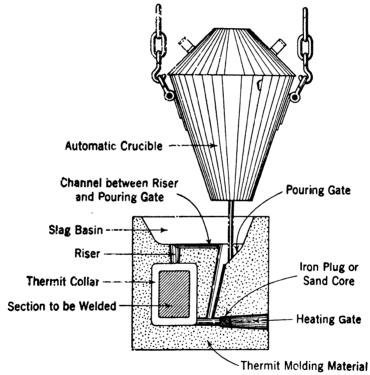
A complete thermit assembly showing the crucible and the mold (Courtesy of: Metal and Thermit Corporation)
